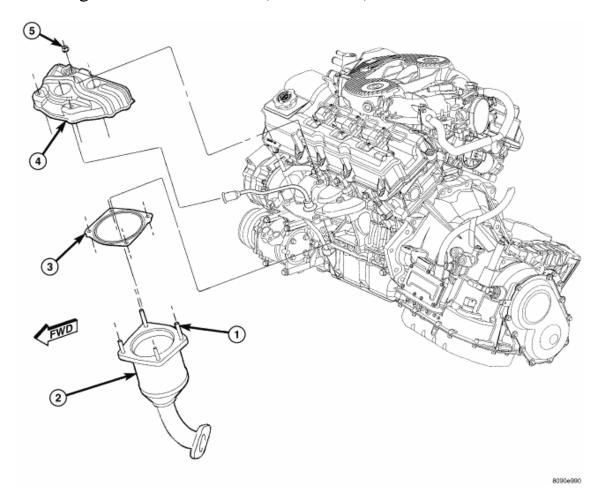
Identifying Front Catalytic Converter - 2.7L Courtesy of CHRYSLER LLC
